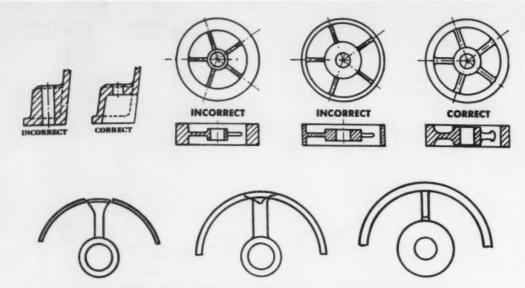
Uniform, well-proportioned sections are important, as shown by feet at upper left and gear blanks, upper right. On correctly designed gear blank, the rim, spoke, and hub sections are well balanced. Pulley castings shown at bottom have improperly proportioned rims, arms, and hubs, resulting in cracking.
